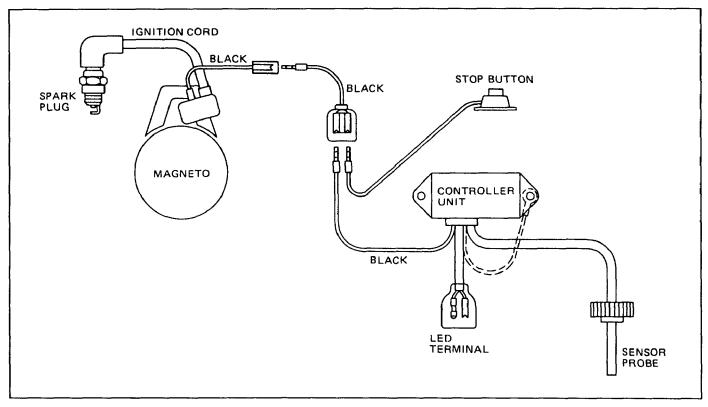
Wiring of W1-145, W1-185, W1-230 and W1-280 Oil Sensor
